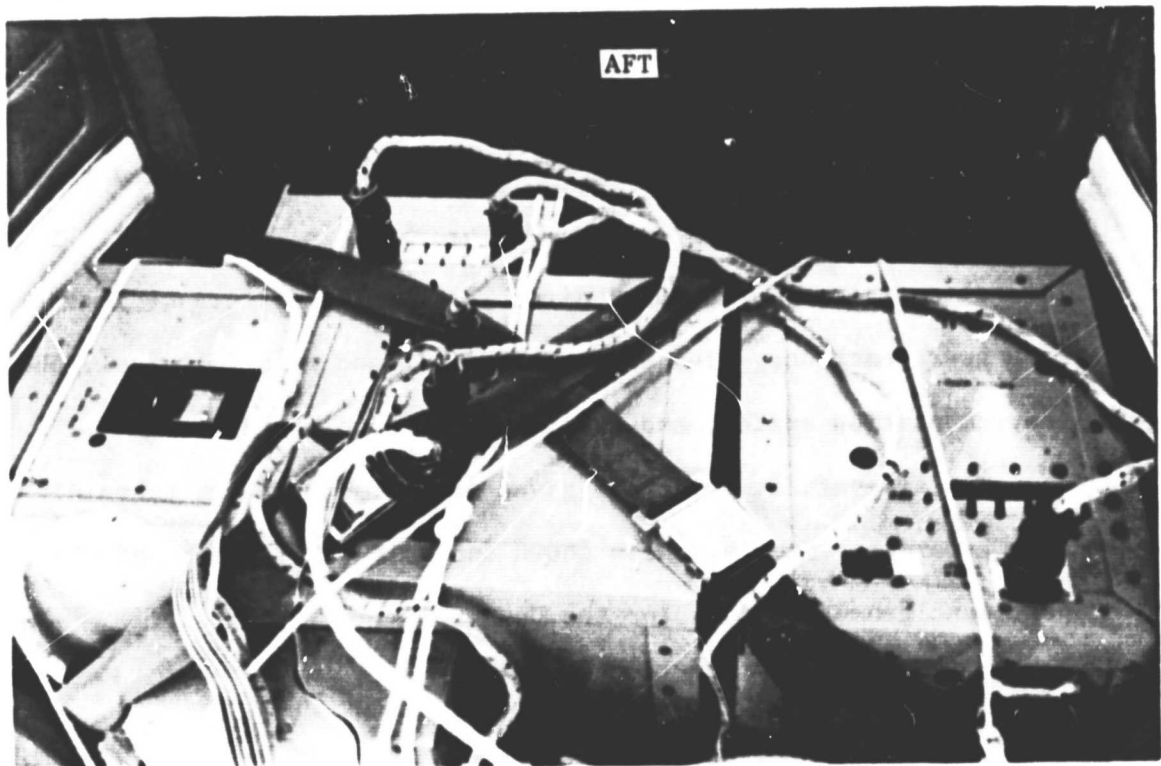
Installed Battery and Computer Modules (Oblique View)
